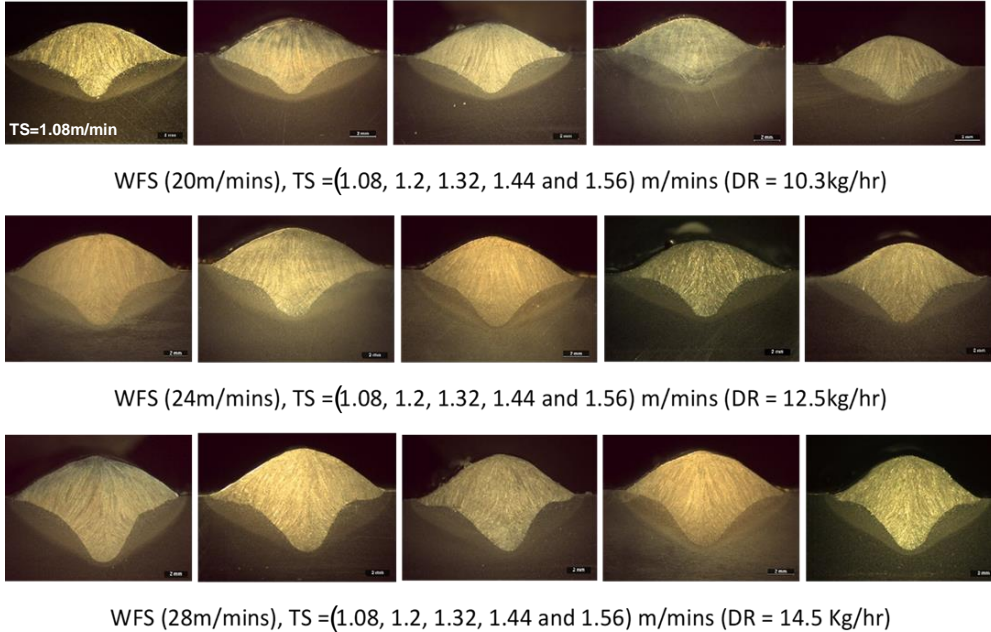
Cross sectional macrographs of deposited bead, produced using Tandem-GMAW (series wire) configuration
